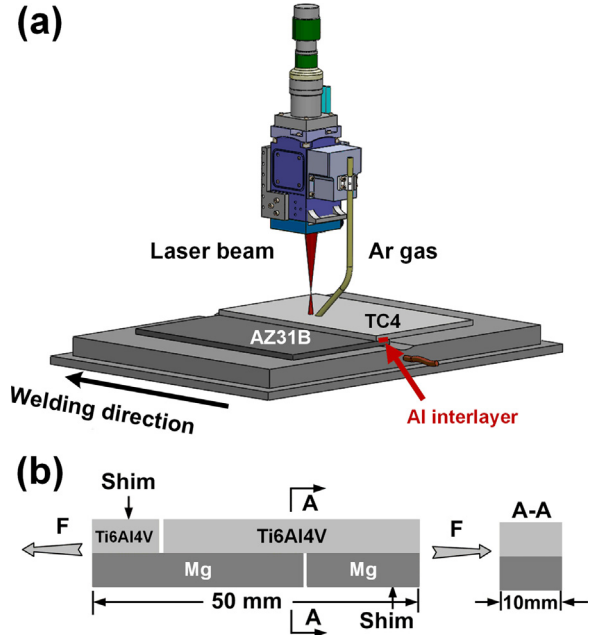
Schematic of laser conduction welding and the tensile-shear testing specimen: (a) laser welding process of Mg to Ti with Al interlayer; (b) tensile-shear test specimen.
